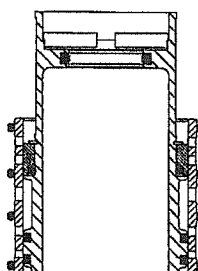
DRY LUBE APA VALVE ASSEMBLY
